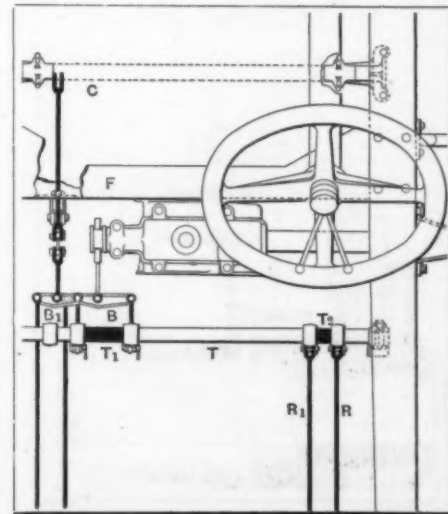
A simple method of coupling the brake rods to braces to insure compensation
